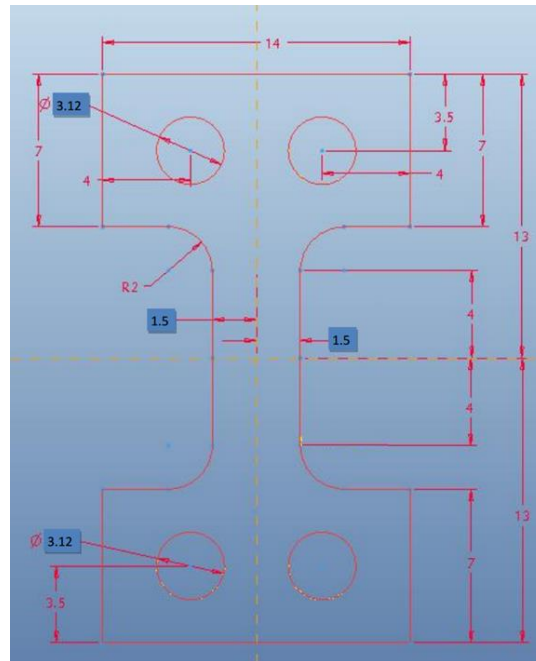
Geometry of in-situ tensile test specimen (all dimensions are in mm)
